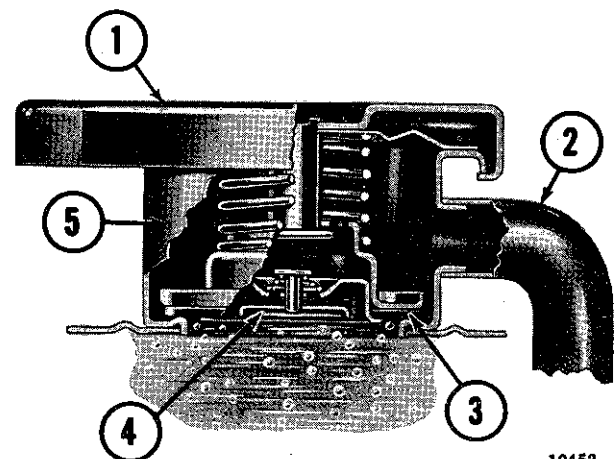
RADIATOR PRESSURE CAP INSTALLED
